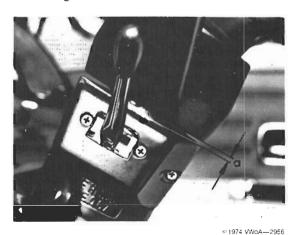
Clearance (dimension a) between turn signal switch and steering wheel.
